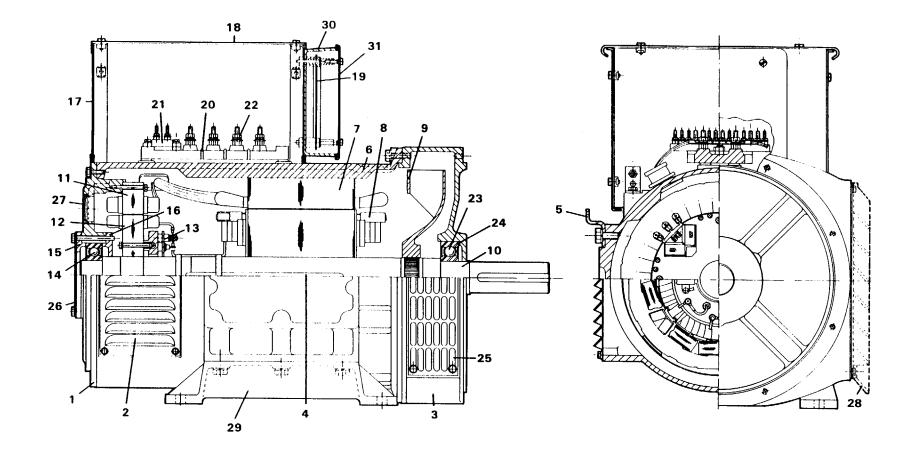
SC1 - 2 TWO BEARING MACHINE (INBOARD EXCITER)
